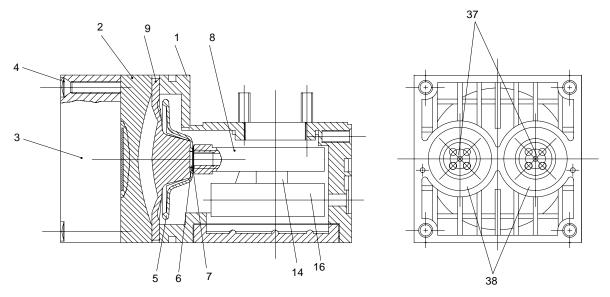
Pump body, pump motor and fan wheel of the diaphragm Pump Model 3N
